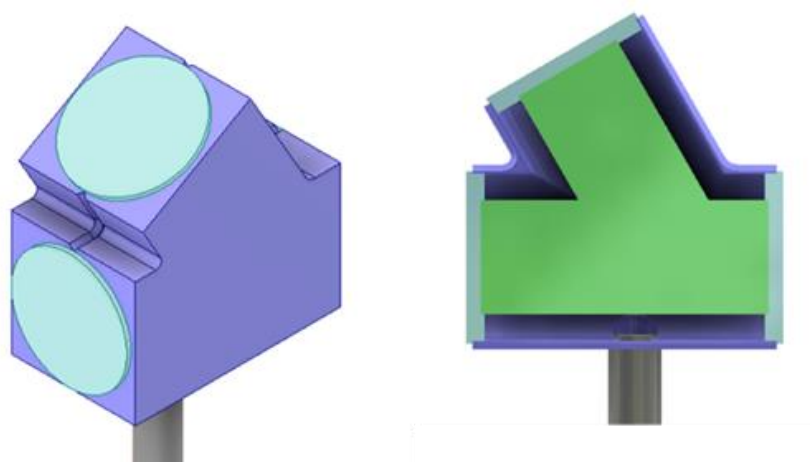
3D CAD drawing of the designed canister highlighting the presence of a solid inner core and a deformable outer shell.
